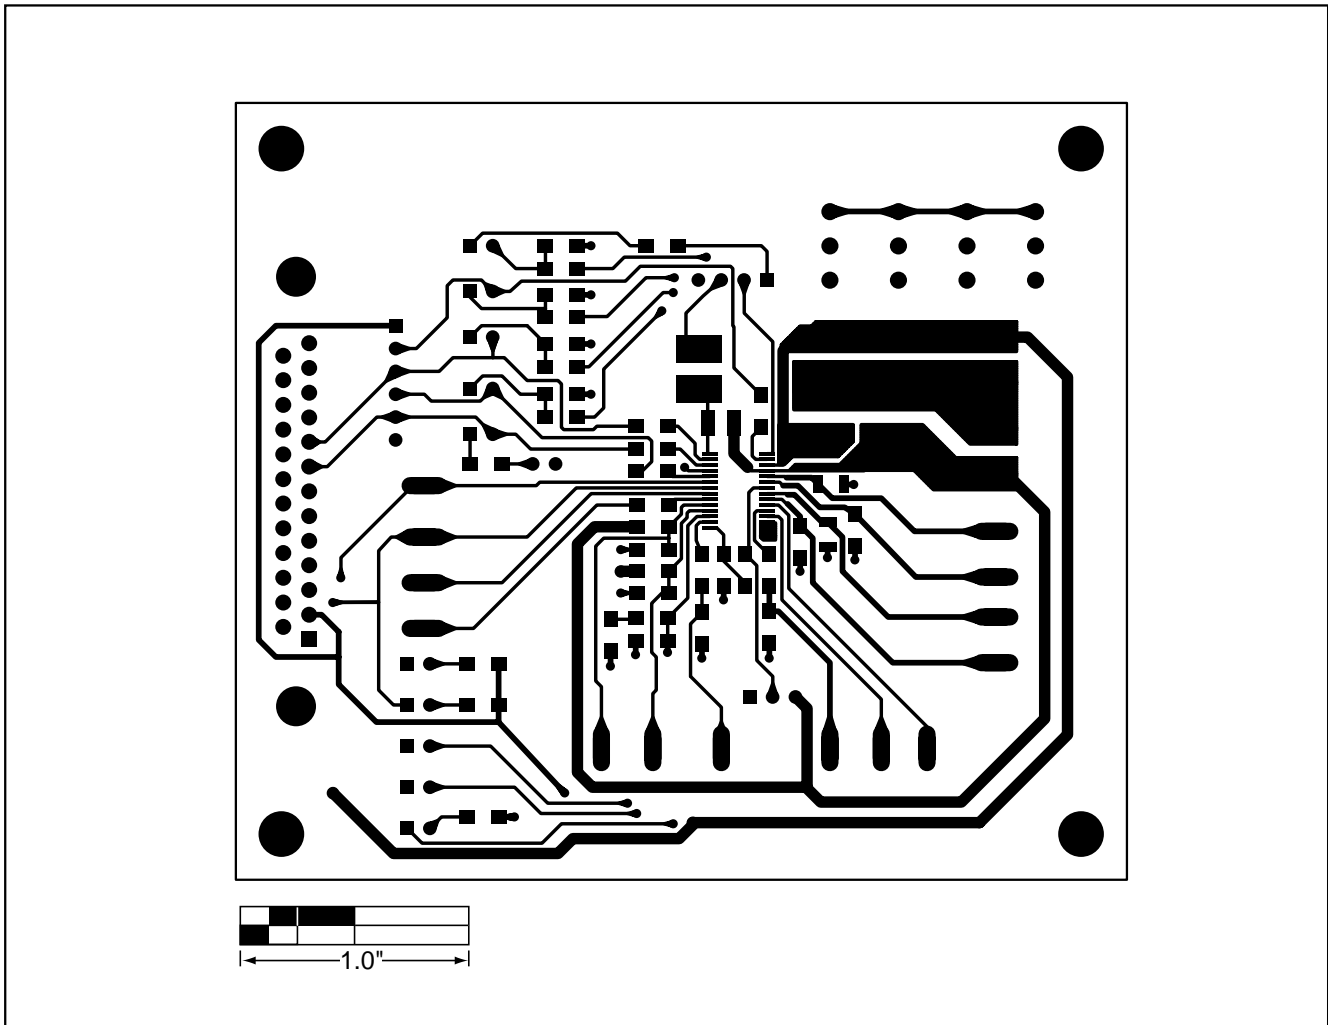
MAX769 EV Kit PC Board Layout—Component Side
